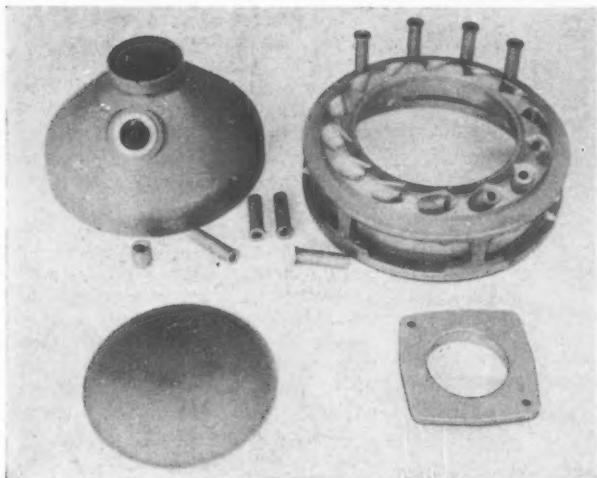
A View of the Stainless-steel Components [for the Assembly in Fig. 4
